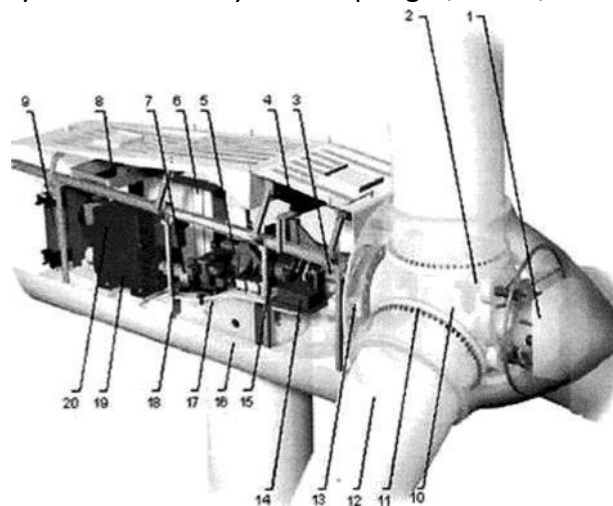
WTGS with asynchronous generator (V 80-2.0 MW; 1 — hub controller, 2 — pitch cylinder, 3 — main shaft, 4 — oil cooler, 5 — gearbox, 6 — generator controller with converter, 7 parking brake, 8— service crane, 9 step-up transformer, 10 blade hub, 11 blade bearing, 12 — blade, 13 — rotor lock system, 14 — hydraulic unit, 15 — hydraulic shrink disk, 16 — yaw ring, 17 — machine foundation, 18 — yaw gears, 19 — generator, 20 — generator cooler).
